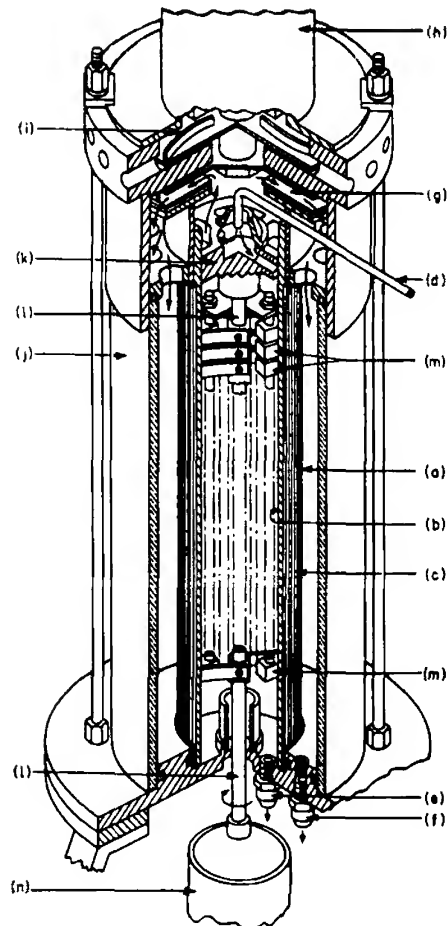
Scraped surface heat exchanger tested by Lustenader *et al.* [35]. (a) Heat transfer tube; (b) surface for thin-film evaporation; (c) surface for thin-film condensation; (d) raw water inlet; (e) concentrate outlet; (f) condensate outlet; (g) vapor compressor; (h) vapor compressor drive motor; (i) drive motor cooling fan; (j) Pyrex[®] Corning Glass Works, (Corning, NY) glass jacket; (k) raw water distributor; (l) wiper; (m) spring-loaded carbon brushes; (n) wiper drive motor. From Lustenader *et al.* [35].
